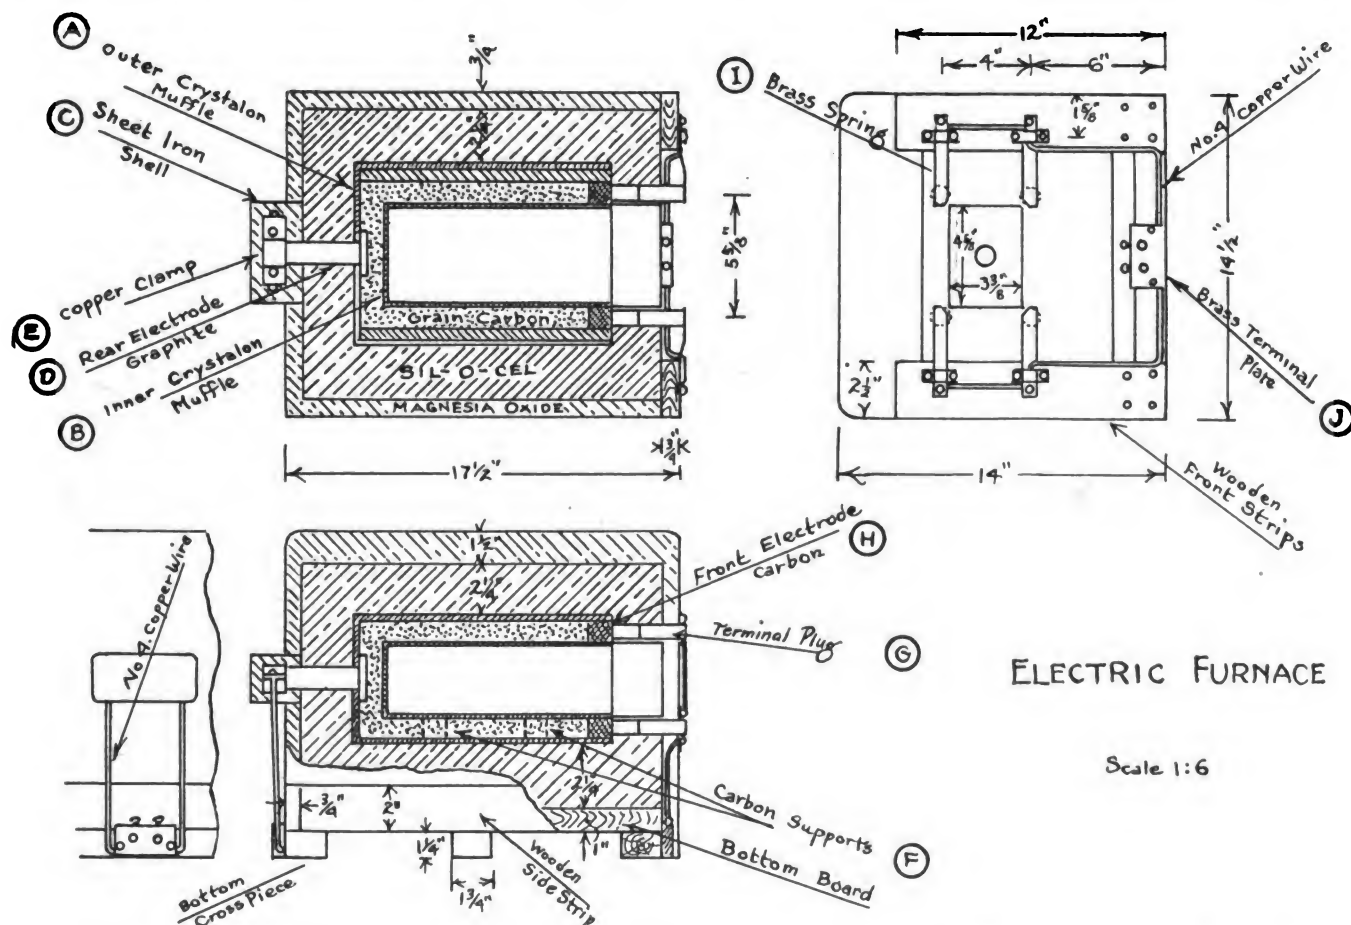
DETAILS OF THE FURNACE AFTER ASSEMBLY SHOWING CONSTRUCTION AND METHOD OF ASSEMBLING PARTS
